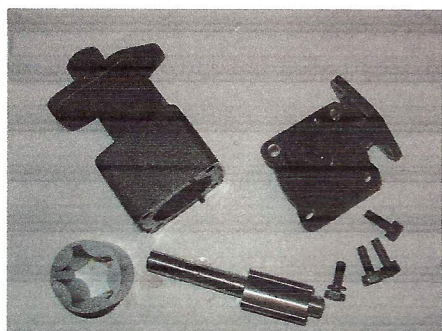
shows all of the parts of the new design ready for assembly; notice the pins in the pump body and locating holes in the end plate and also the pressure holes in the new spindle assembly.
